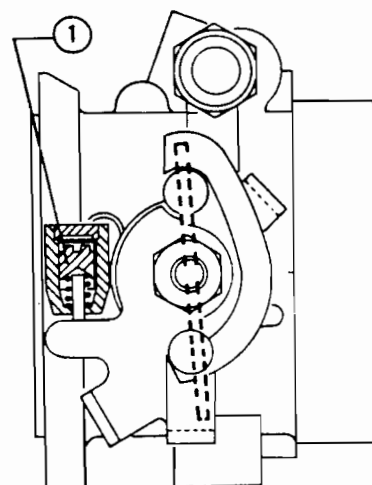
Throttle body setting screw (1) (Sec 5)
